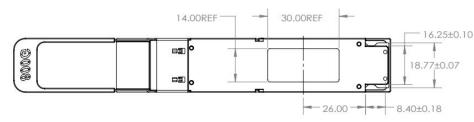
Mechanical Outline Drawing (Unit: mm)
